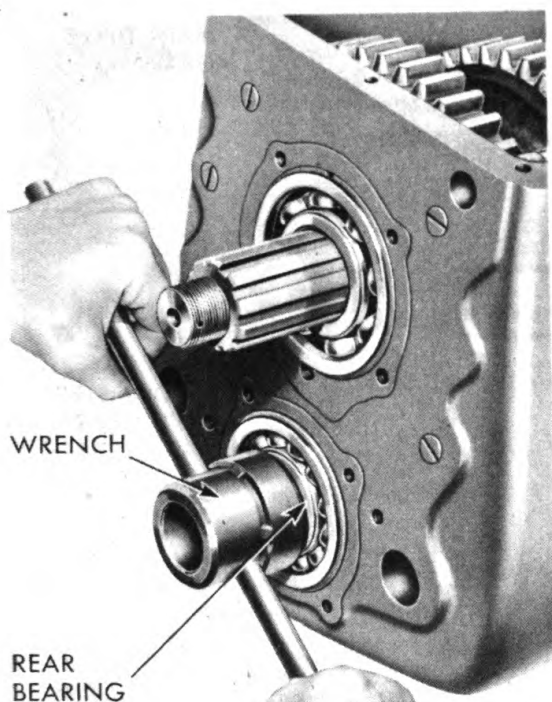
Removing Countershaft Rear Bearing Retaining Nut Using Special Wrench (41-W-3688)
